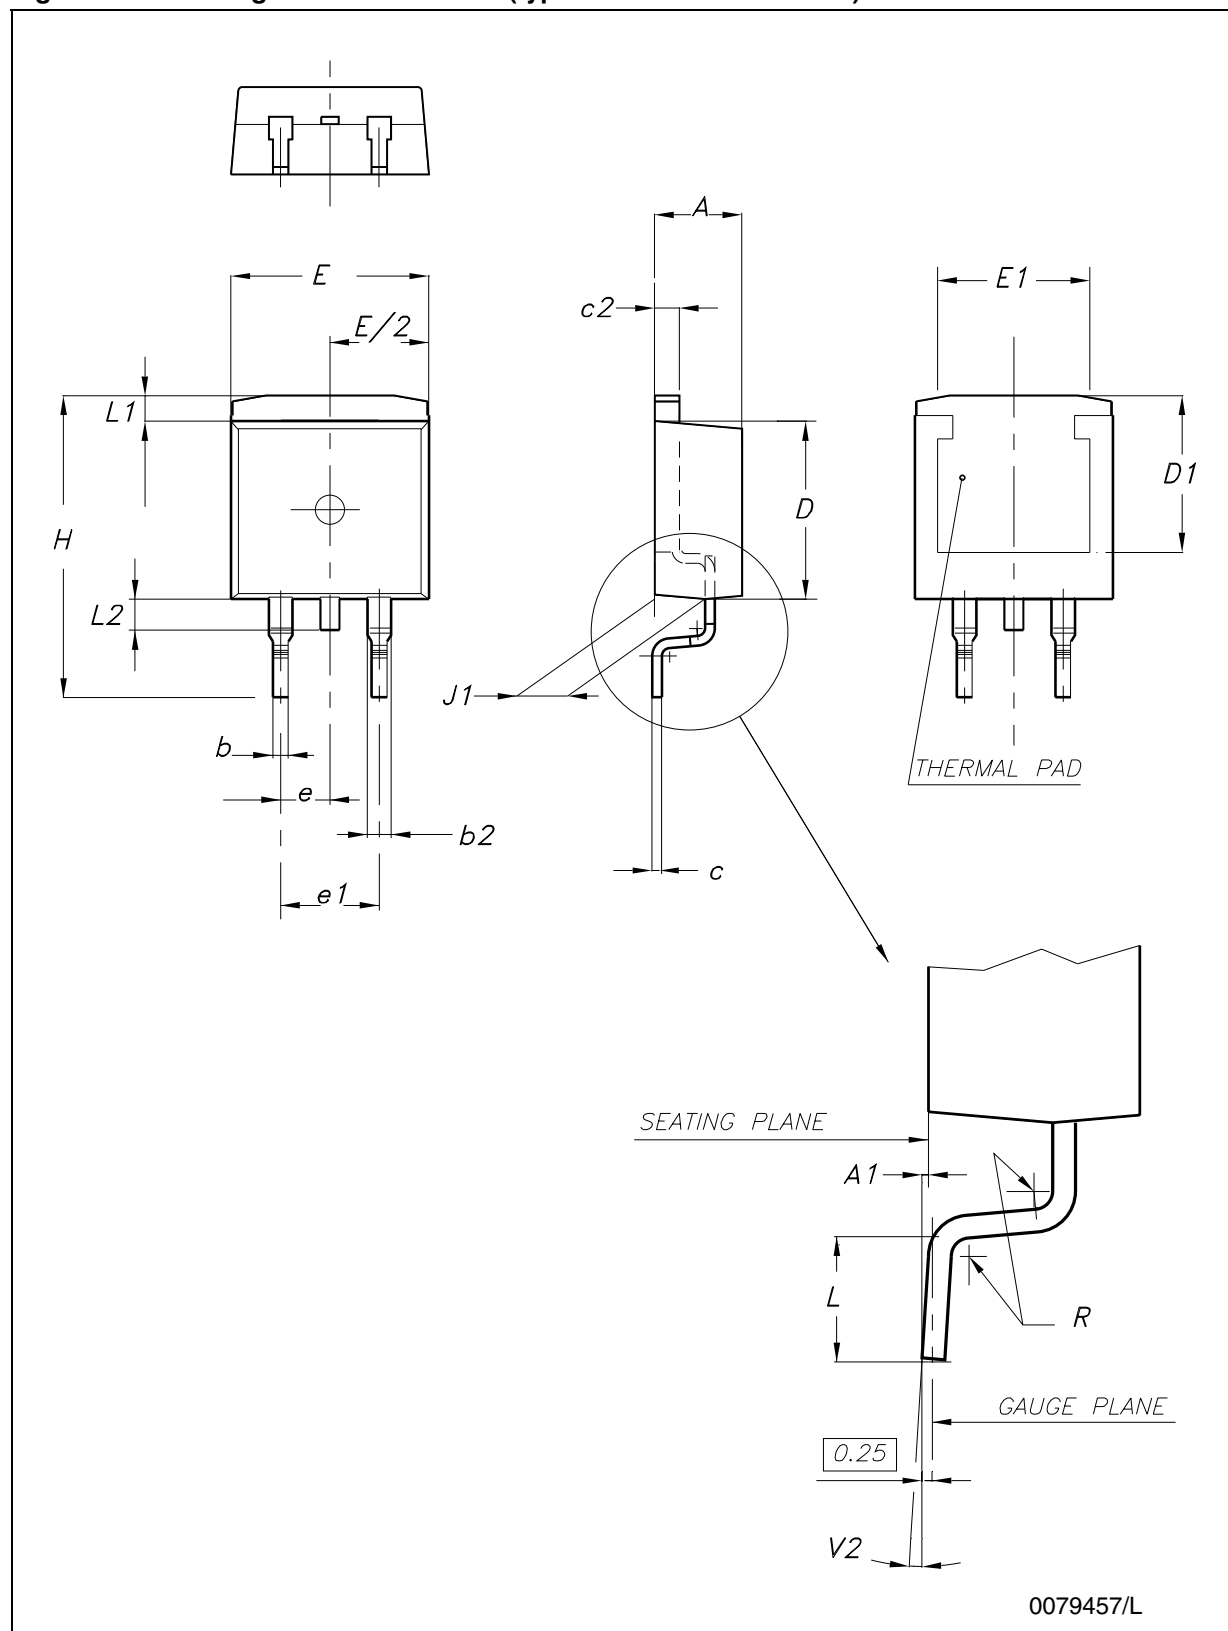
Drawing dimension D²PAK (type WOOSEOK-SUBCON.)
